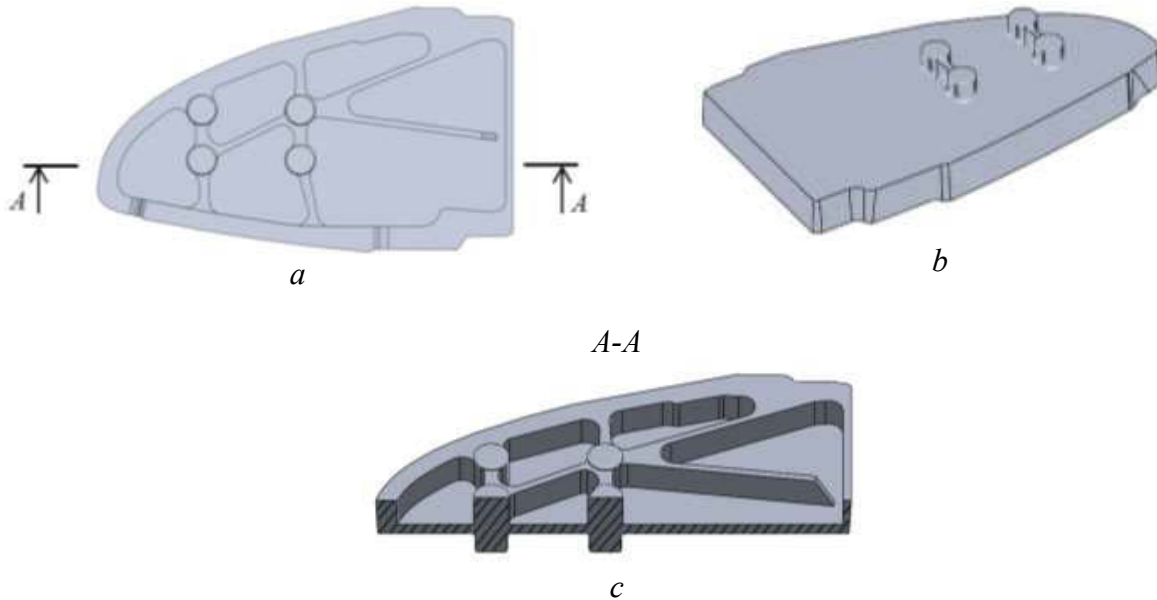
Model forged forgings "Housing": a – top view, b – bottom view, c – section
